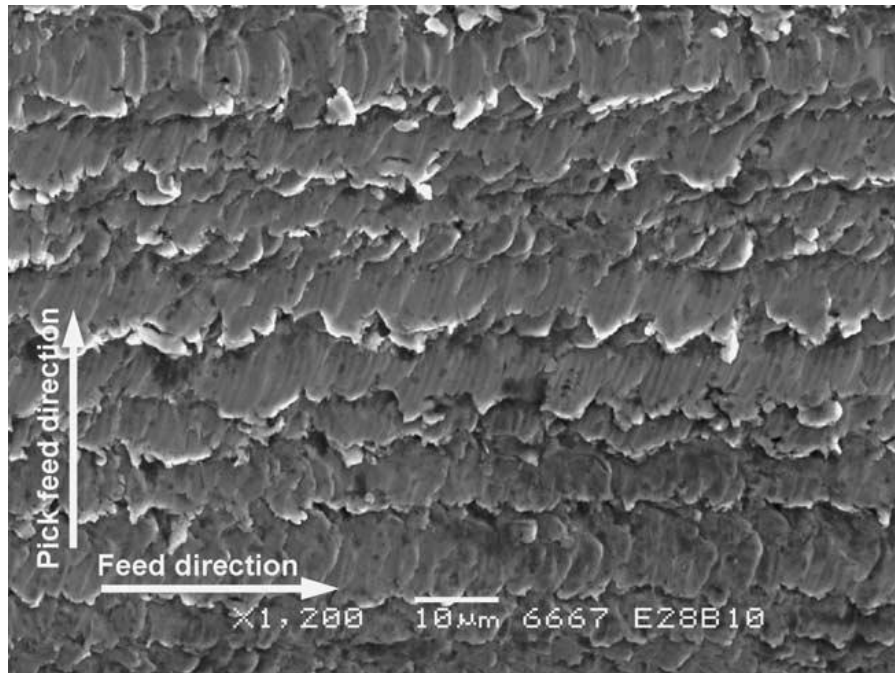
Surface of hardened tool steel (58 HR_c) milled with a 200 μm end mill [8].
